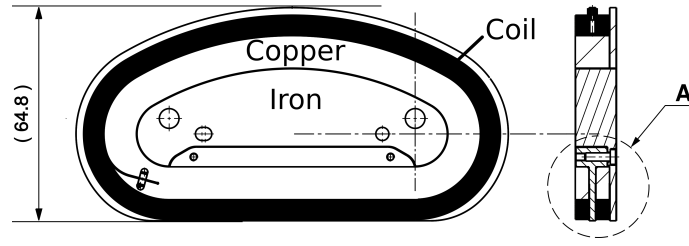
Technical drawings of the VR coil. Front view (left) and cross-section (right). Zone A is displayed in Figure 3.29 in more detail. Measures in millimeters.
